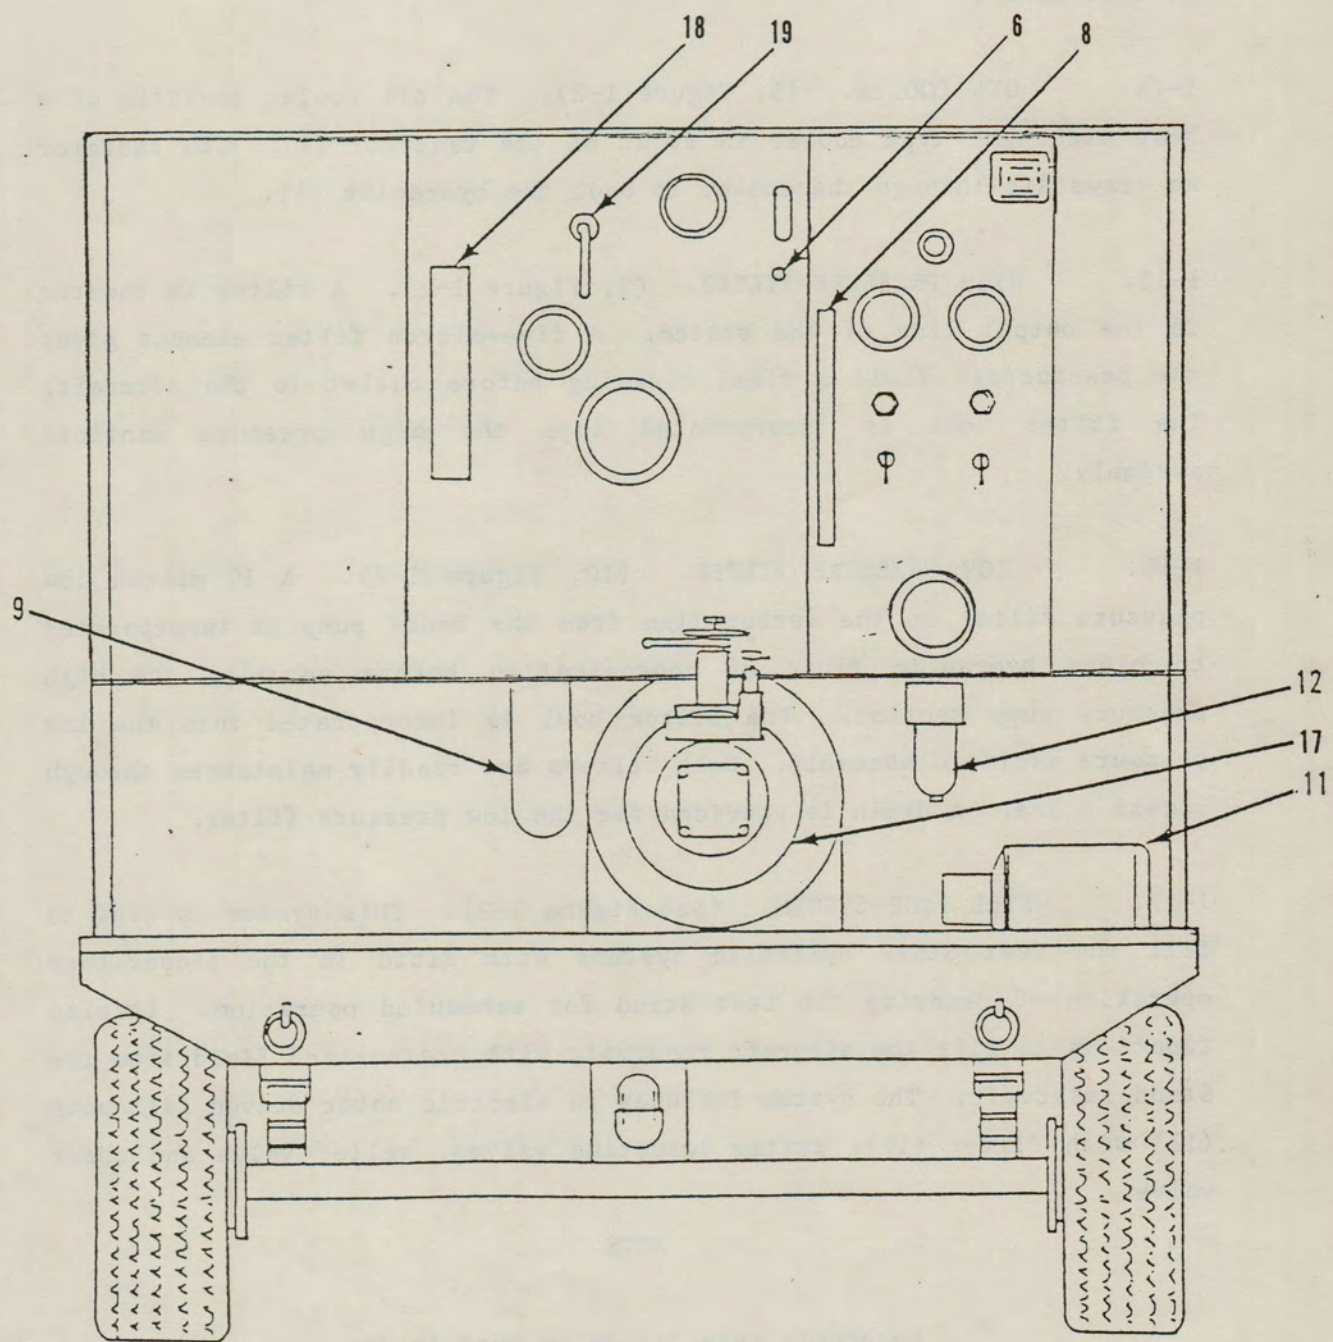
Major Components, Rear View. (Sheet 2 of 2)
